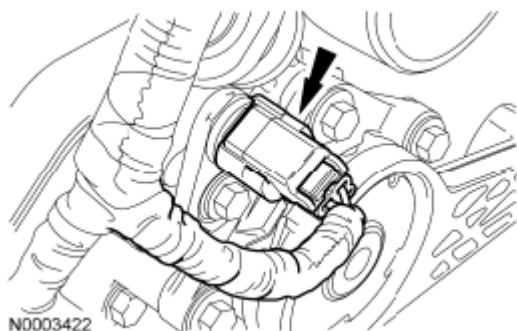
Locating RH Camshaft Position Sensor Electrical Connector
